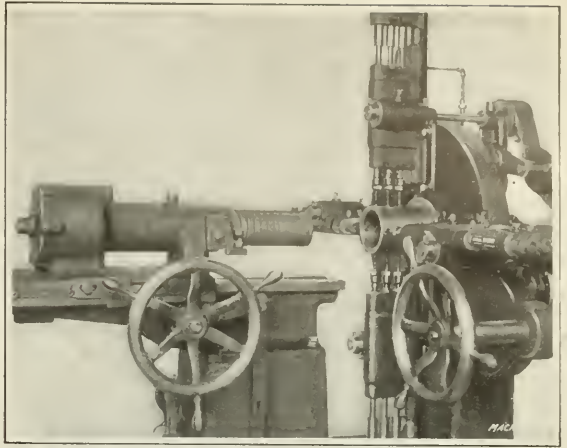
Close View of Mechanism with Drilled Sleeve on Arbor after being withdrawn from Jig
